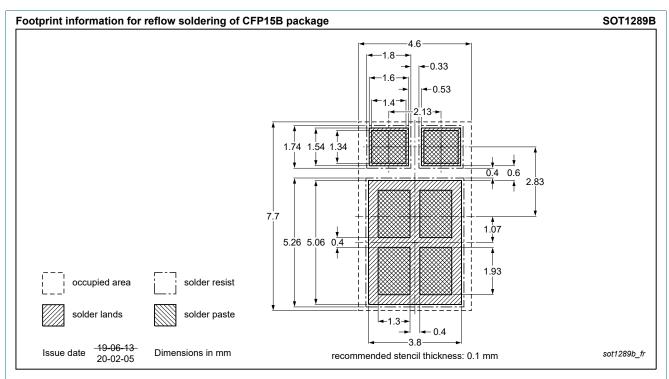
Reflow soldering footprint for CFP15B (SOT1289B)
